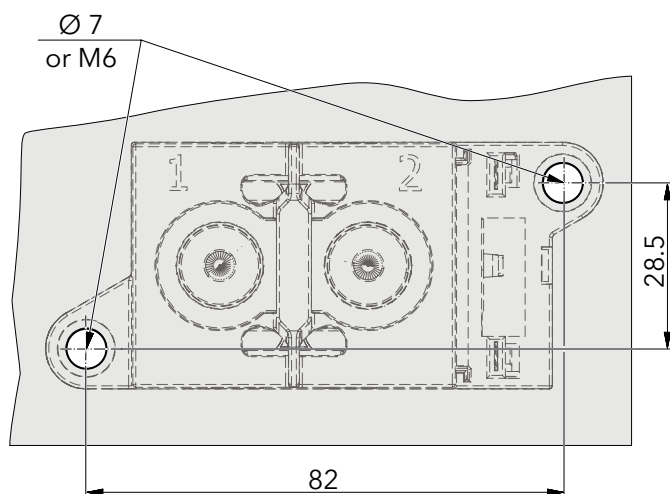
C303-XXX-G0F-....: Dimensions and layout of mounting holes
